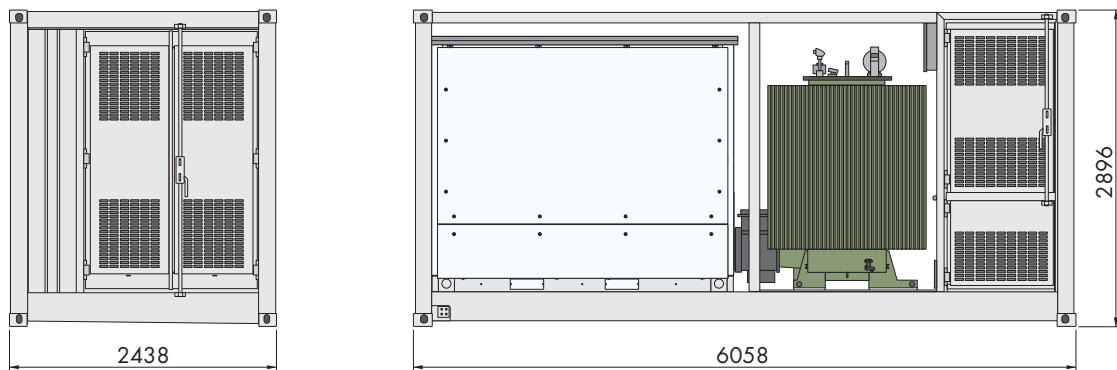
Dimensions of the MV Power Station (Dimensions in mm)
